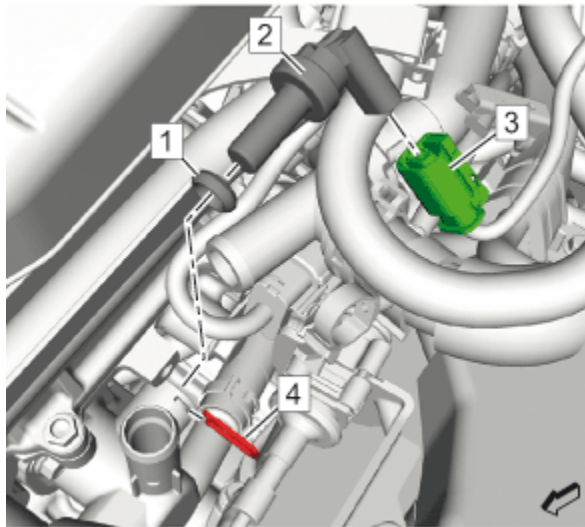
Engine Coolant Temperature Sensor, Electrical Connector, Retainer And Seal
